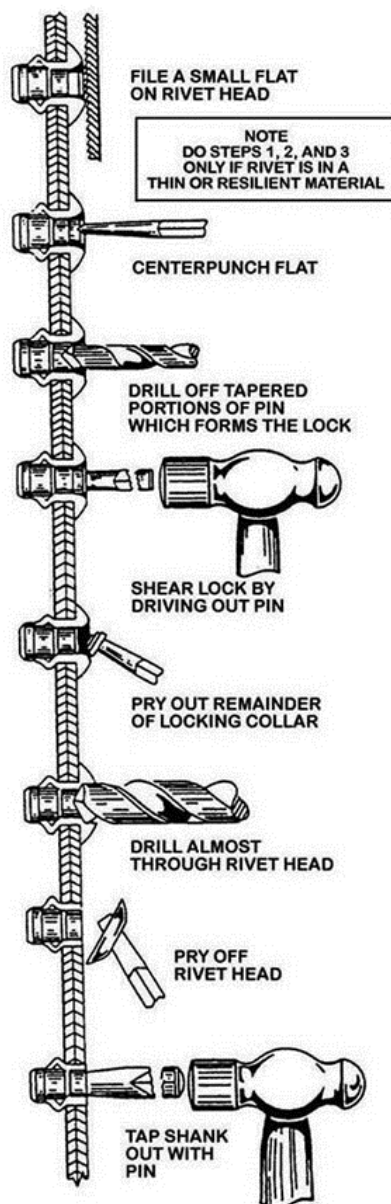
Mechanical-lock blind rivet removal sequence.
